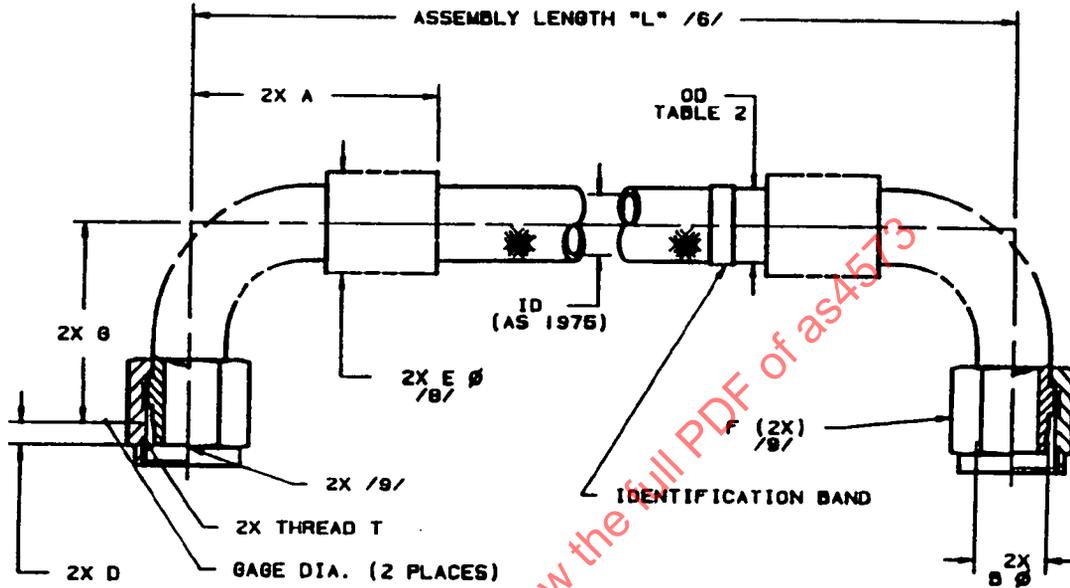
HOSE ASSEMBLY, 90° ELBDW TD 90° ELBOW
